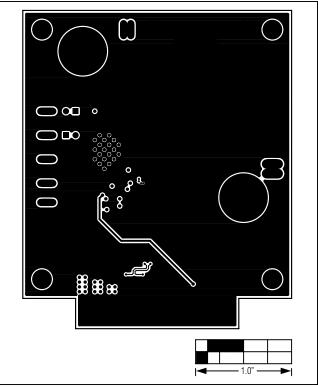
MAX15118 EV Kit PCB Layout—Inner Layer 3
